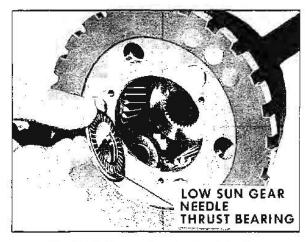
Removing Low Sun Gear Needle Thrust Bearing
